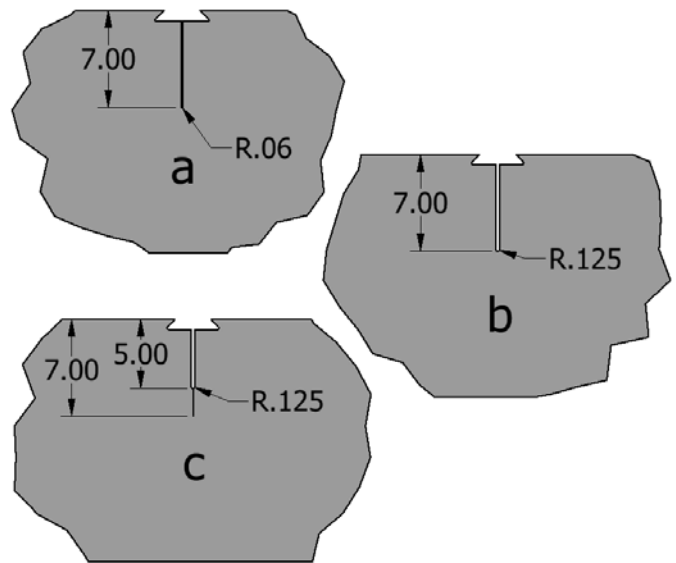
Notch geometry details for (a) 0.1 mm wire EDM, (b) 0.25 mm wire EDM and (c) fatigue pre-cracked specimens (all linear dimensions in mm). Note that dimensions given were provided for the purpose of machining and are not the as-tested condition, which require careful measurement prior to testing.
